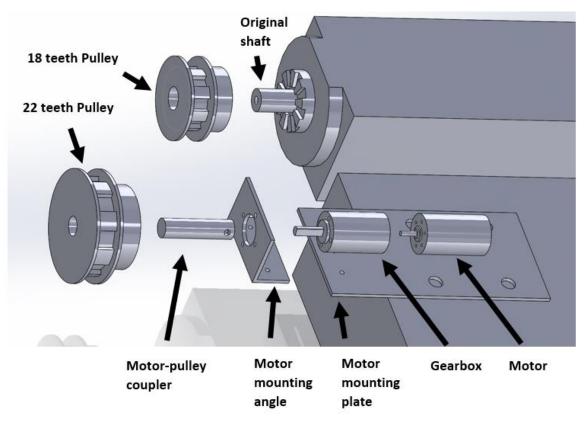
Exploded labeled picture of X-Axis Mounting (without belt)
